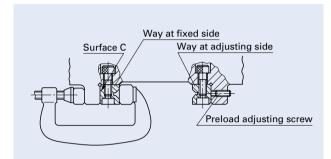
Mounting of ways at table side (for Anti-Creep Cage Crossed Roller Way)
